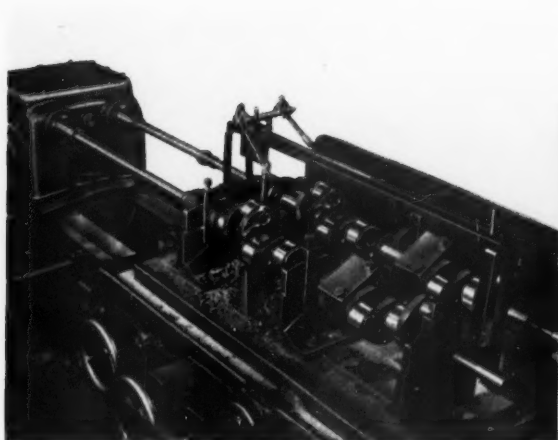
A Kitchen and Wade machine adapted for rough boring main journals
